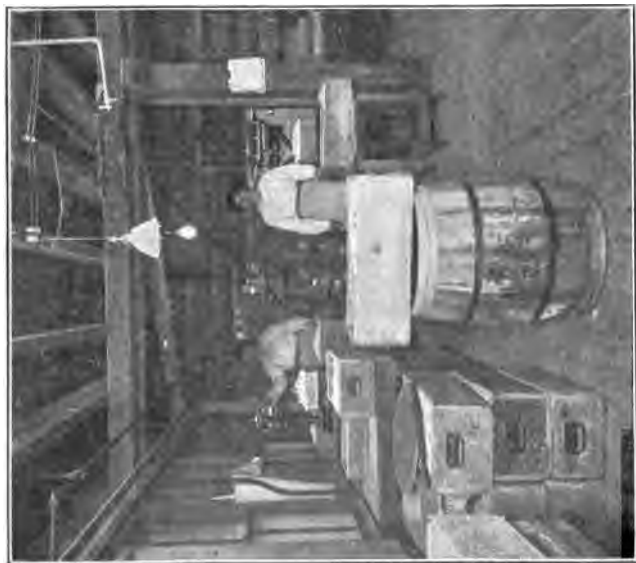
MACHINE COUNTING IN THE STOREROOM
